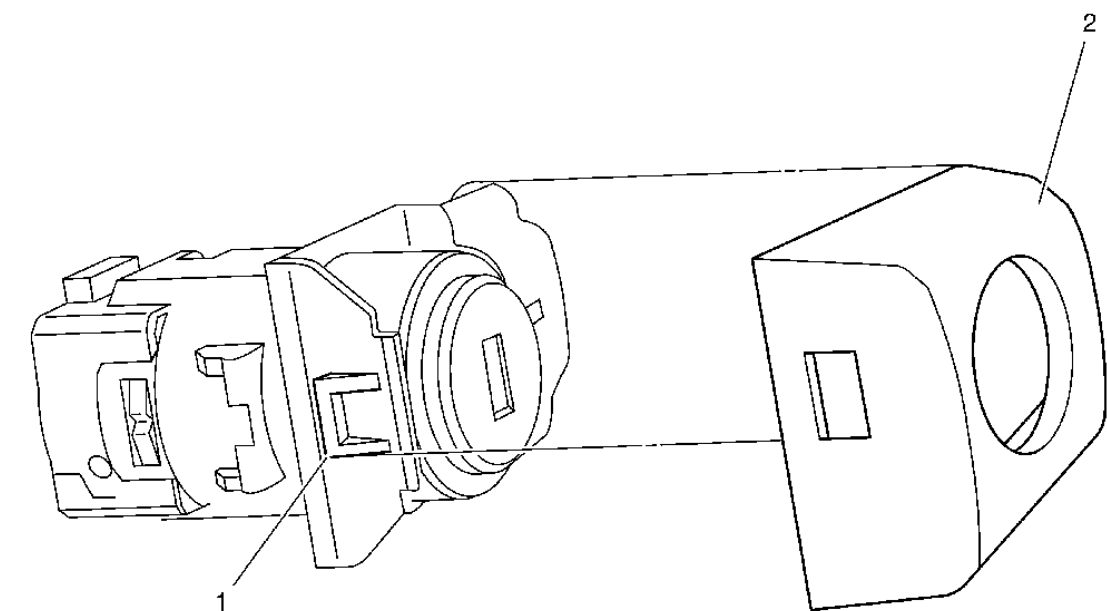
Front Side Door Lock Cylinder Opening Cover Bezel
